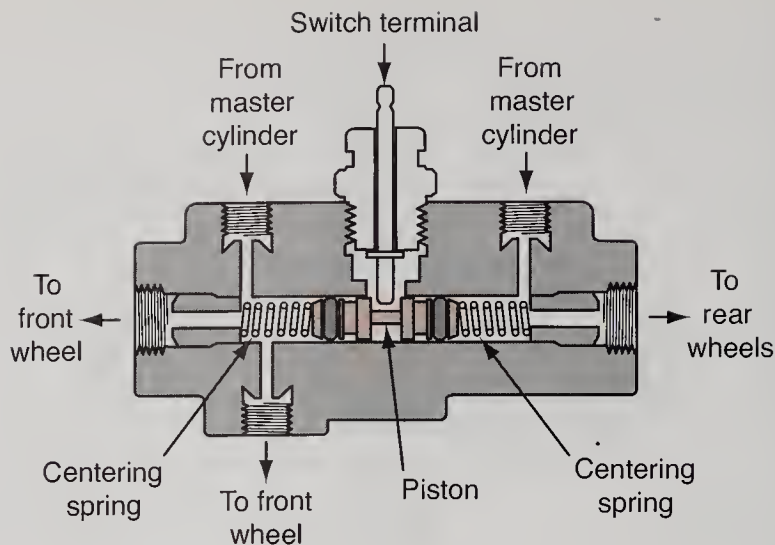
Pressure differential valve (warning lamp switch) with single piston and centering springs.
